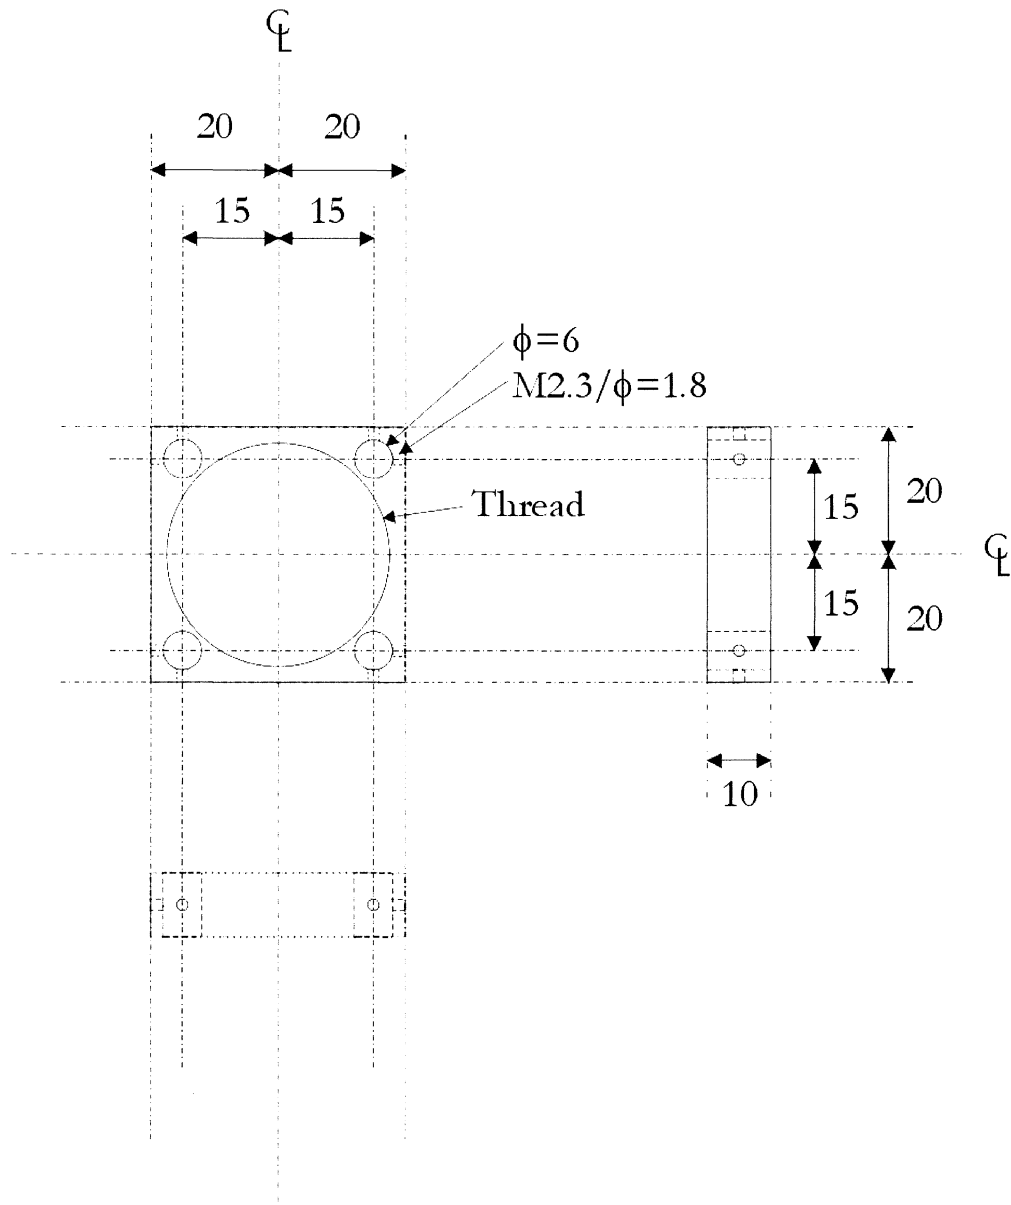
Mounting plate for the adjustment plug for SMA fibre coupling.
